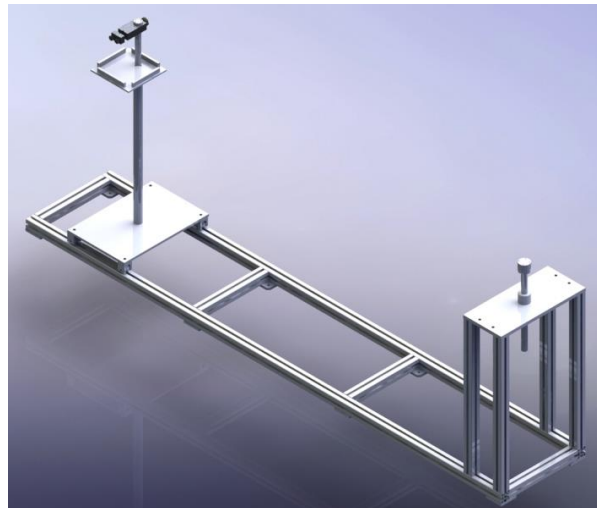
CAD Project of the mechanical bench, the right side is the X-ray tube side.
